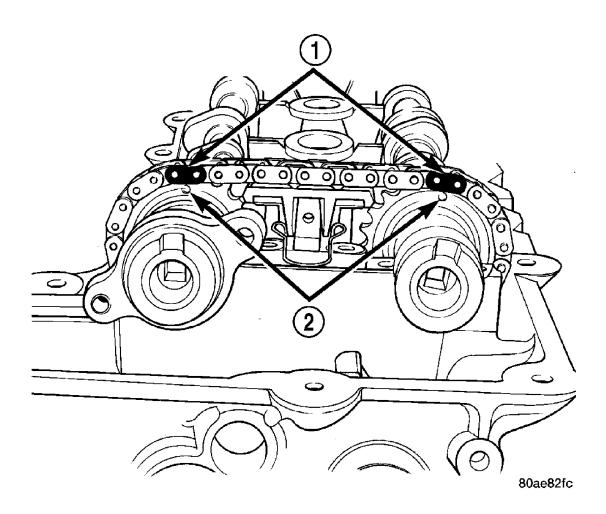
Identifying Camshaft Chain Timing Courtesy of CHRYSLER LLC
